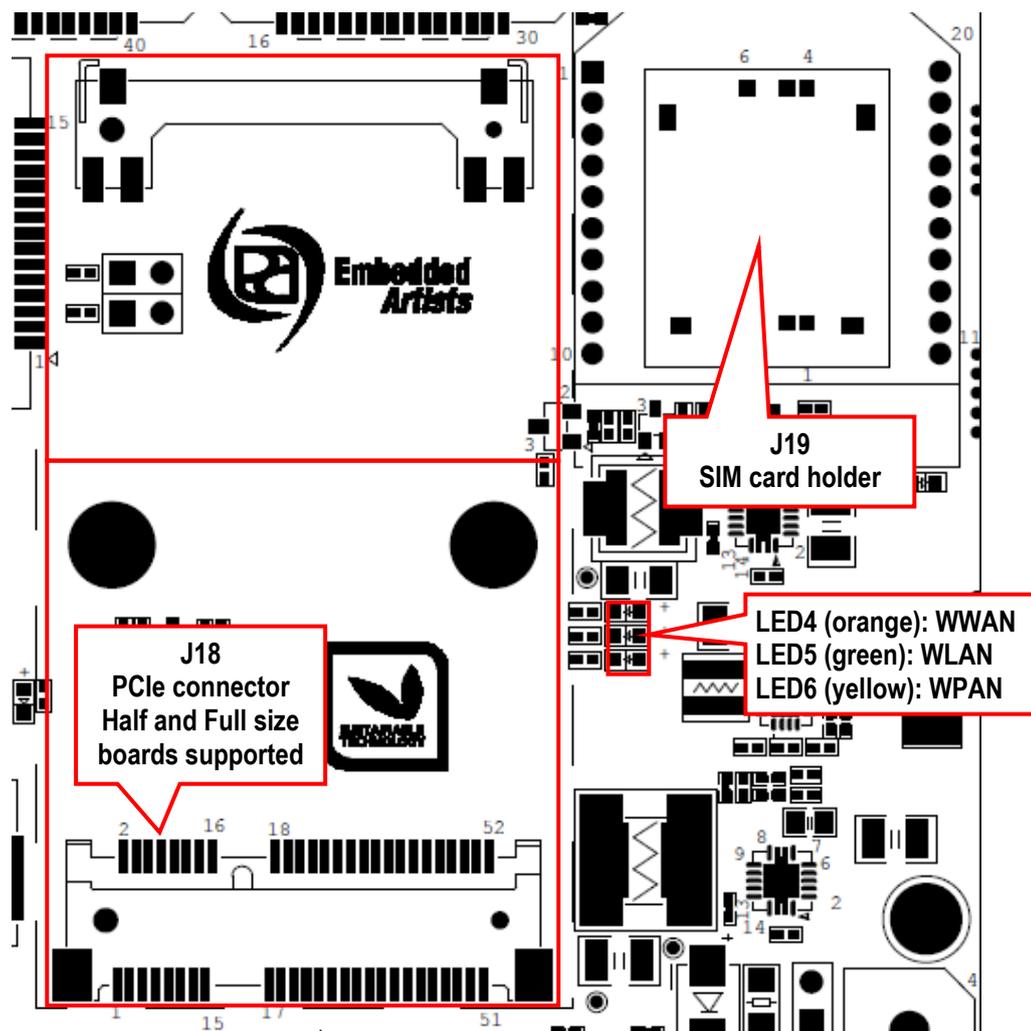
COM Carrier Board, mini PCIe and SIM Card Connector
